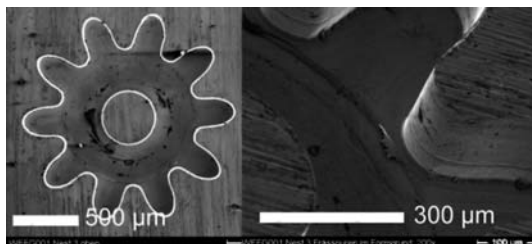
Steel mold cavity (52 HRC) for micro gear (l.) and detail of milled edge (r.)
